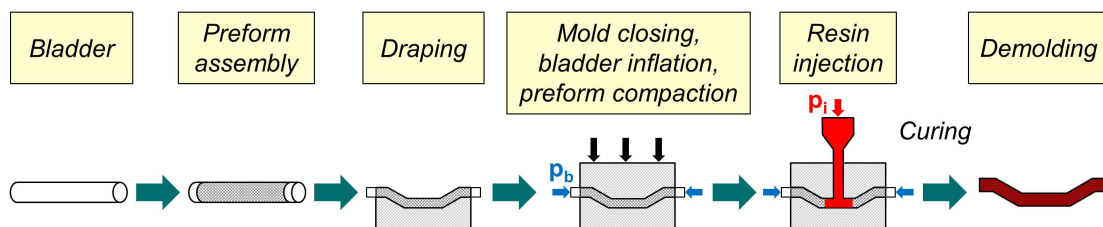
Schematic representation of a simple bladder assisted moulding process [58].
